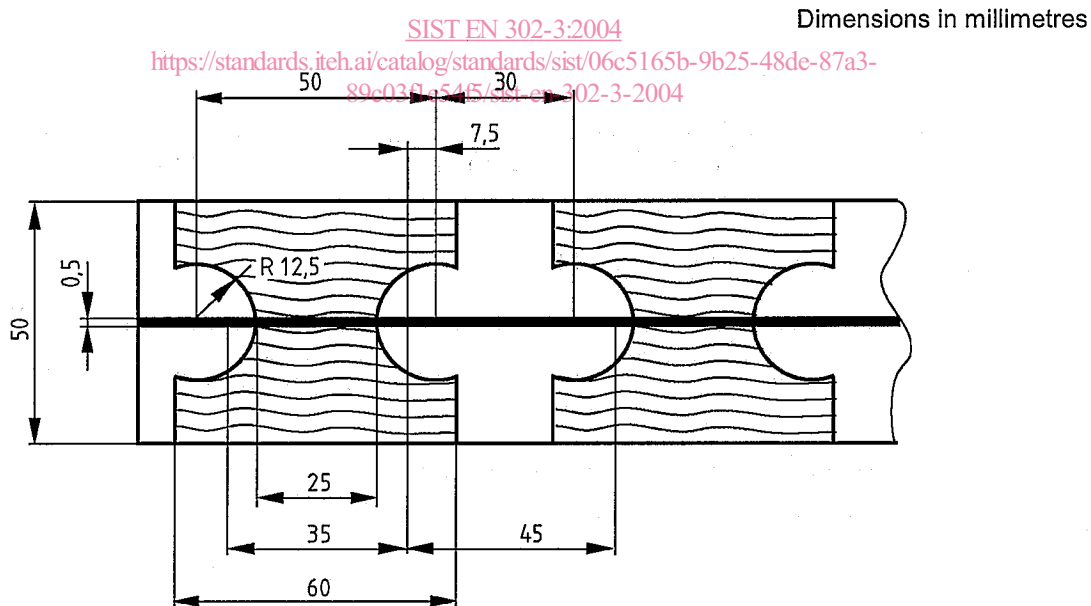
Tensile test pieces cut out of the bonded wooden assembly
